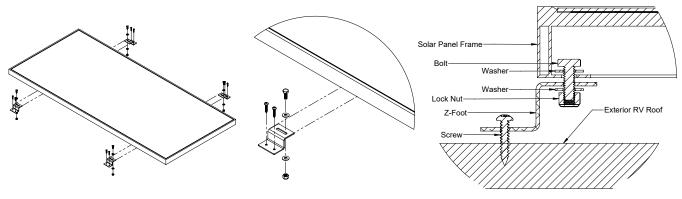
A: SOLAR PANEL INSTALLATION DETAILS
